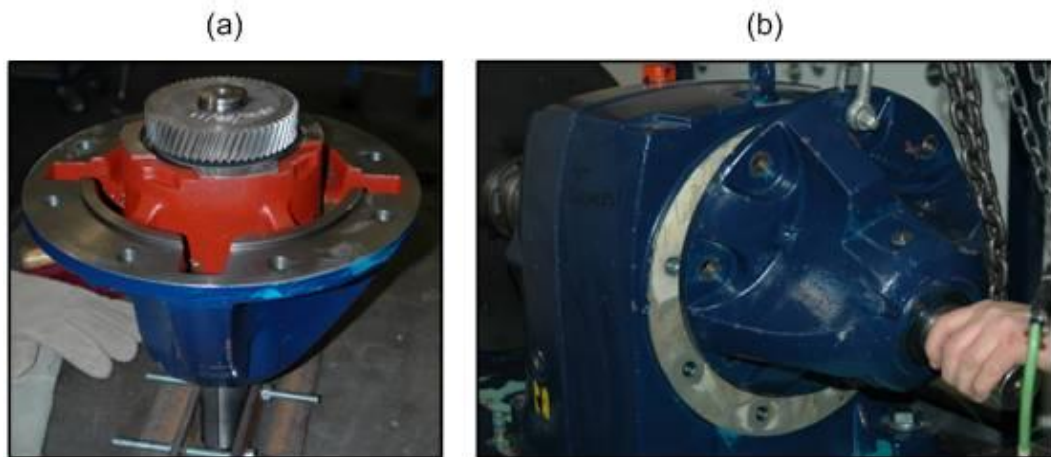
Gearbox showing (a) high speed shaft and pinion assembly with original Hansen gear and (b) its installation
